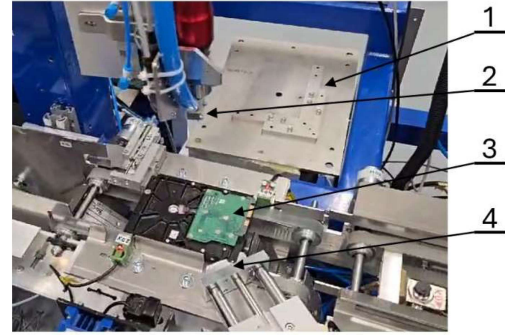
General view of robotic disassembly station: 1 — geometry measurement sub-system, 2 — SCARA robot with the screwdriver, 3 — disassembled HDD, 4 — mechanical slot.
